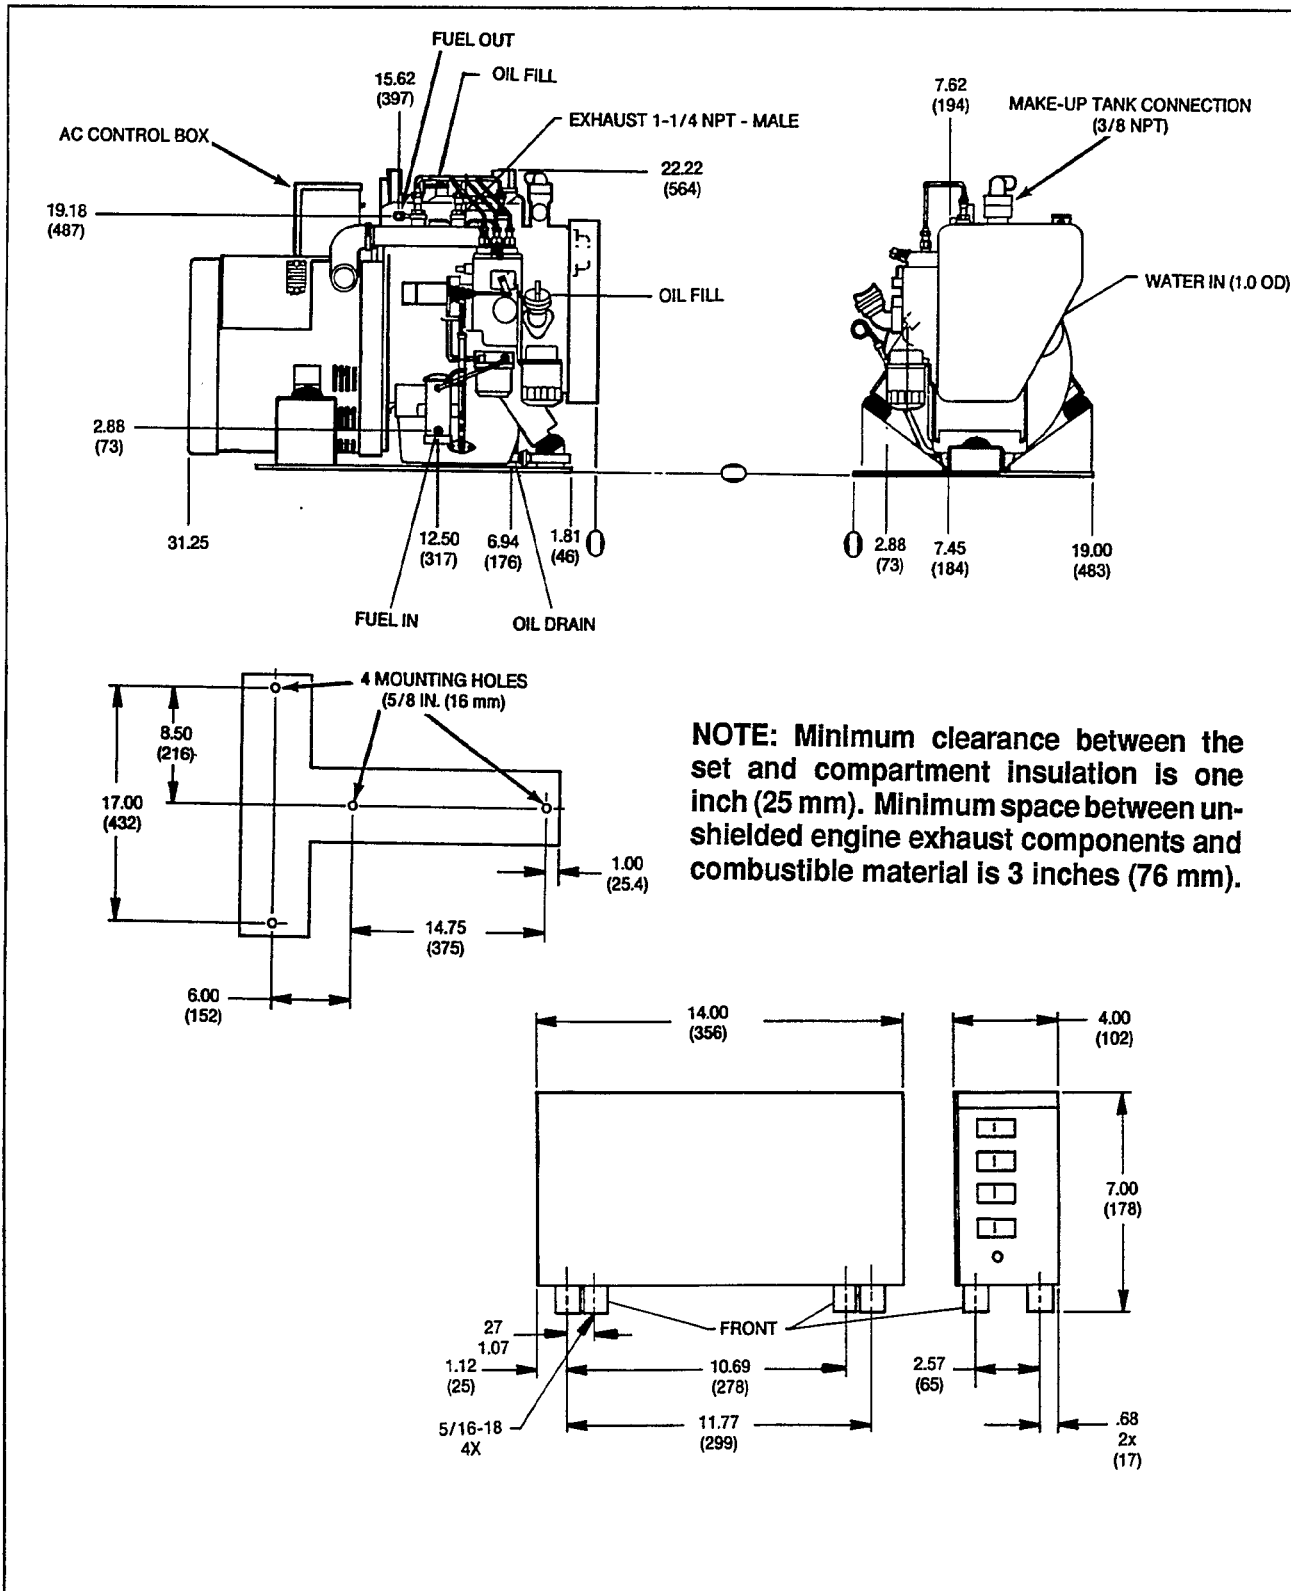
8.0 DKD GENERATOR SET AND CONTROL BOX MOUNTING DIMENSIONS
